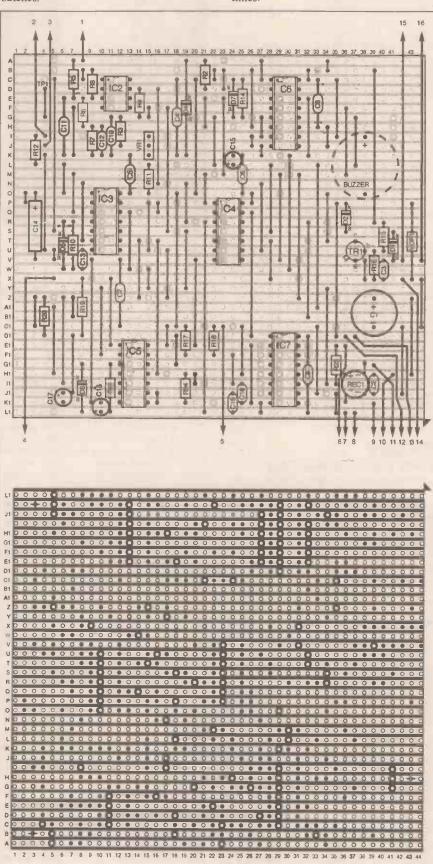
Topside component layout and underside stripboard track cuts and solder joints for the main alarm circuits.
